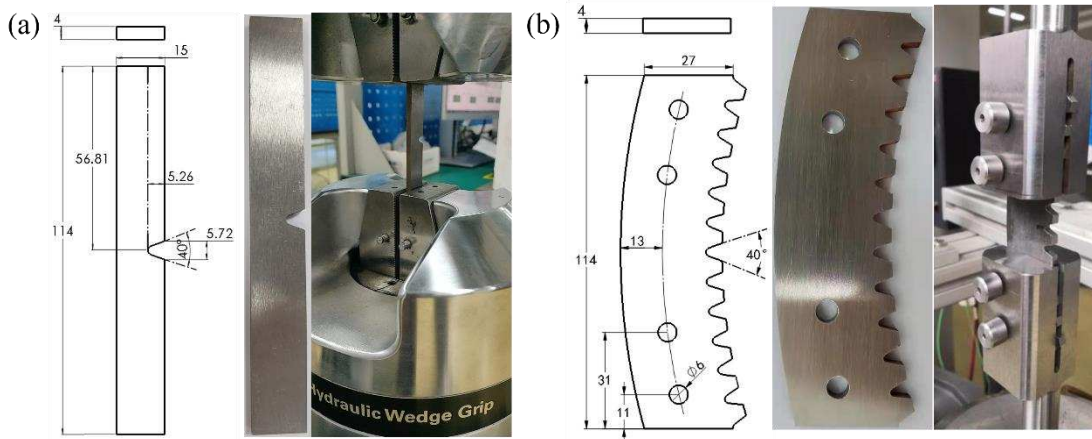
(a) Single-notched specimen dimension, layout and experimental setup; (b) multi-notched component dimension, layout and experimental setup.
